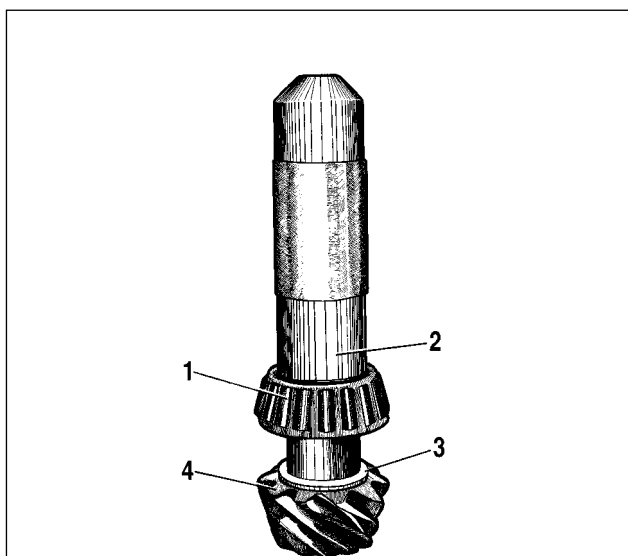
Fitting the rear bearing inner ring on the drive gear:
